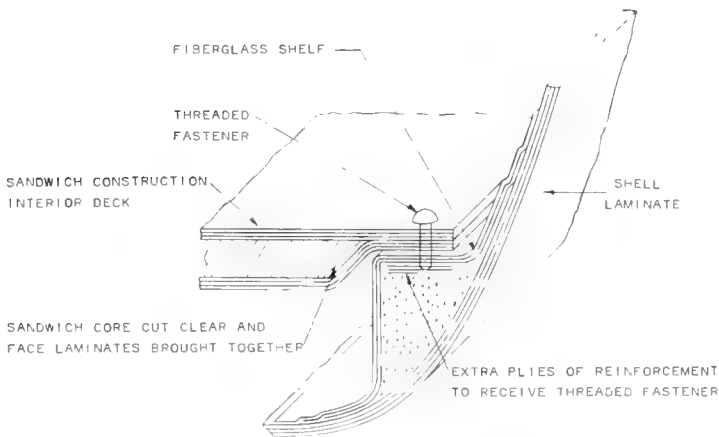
Deck Edge Connection - Interior Deck to Shell
